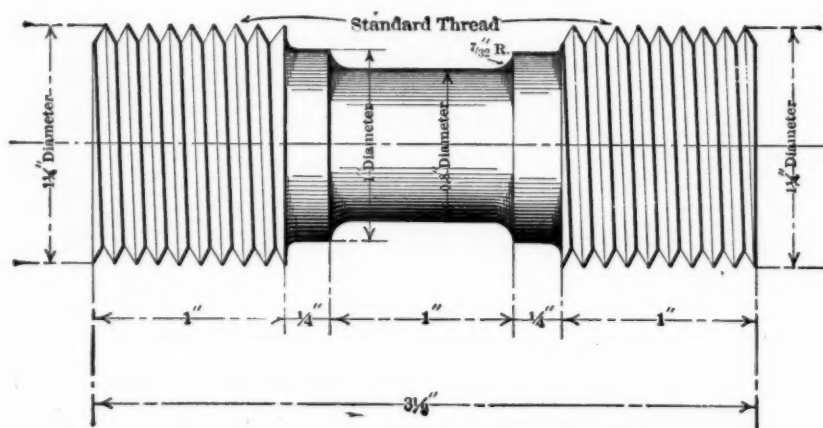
ARBITRATION TEST BAR. TENSILE TEST PIECE.
